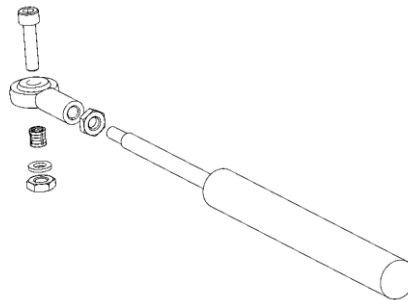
Exploded View of the cylinder and other components [own elaboration, 2021]
